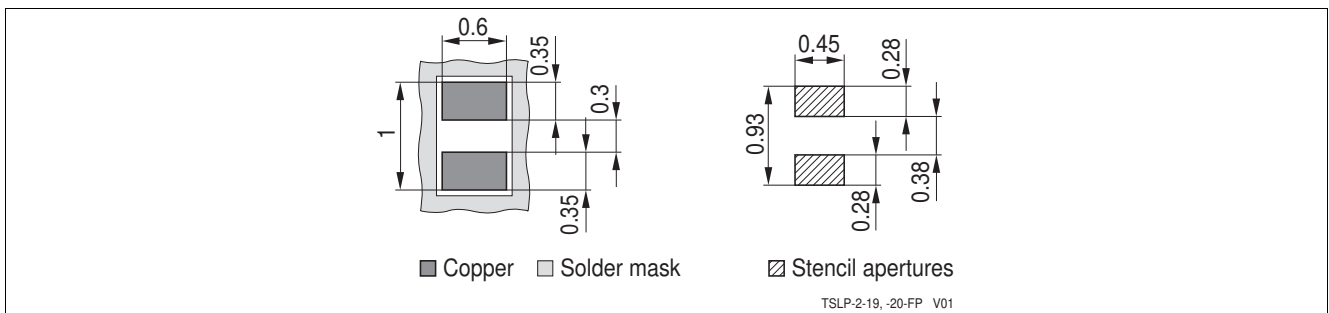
TSLP-2-19: Footprint (dimension in mm)
